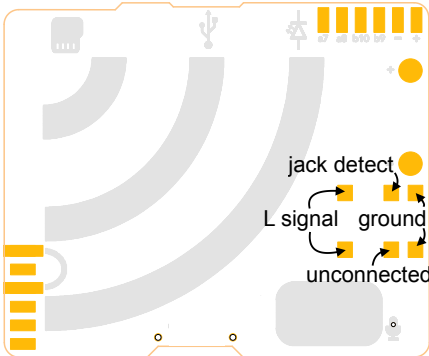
Pad layout of 3.5 mm jack socket footprint. To use a hard-wired external microphone the jack detect pad must be pulled low
